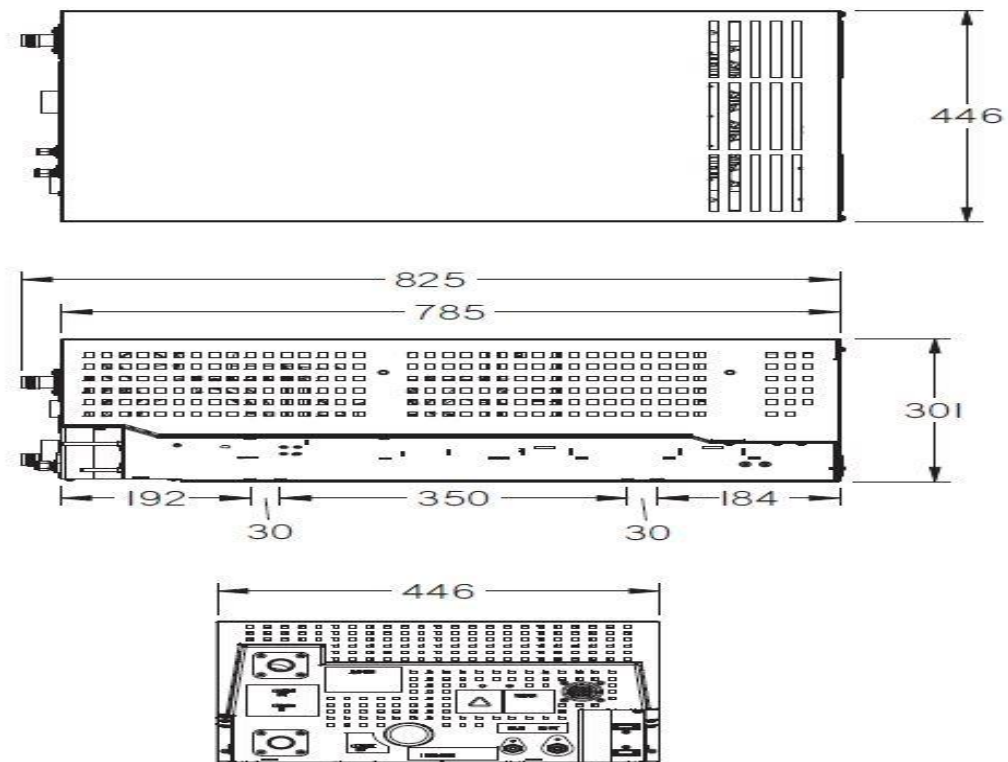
HyPM HD 8 Fuel cell physical dimensions
